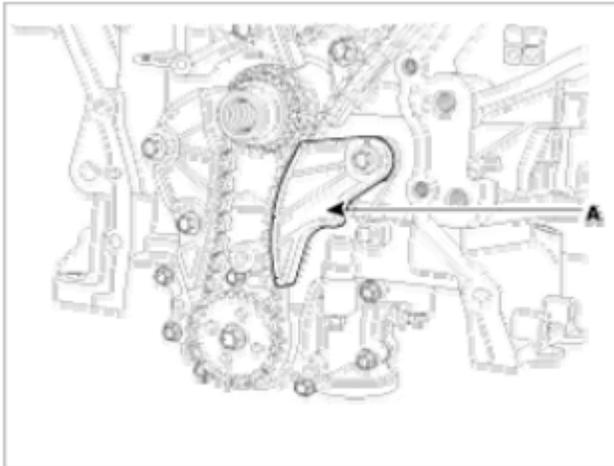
Locating Oil Pump Chain Tensioner Assembly
